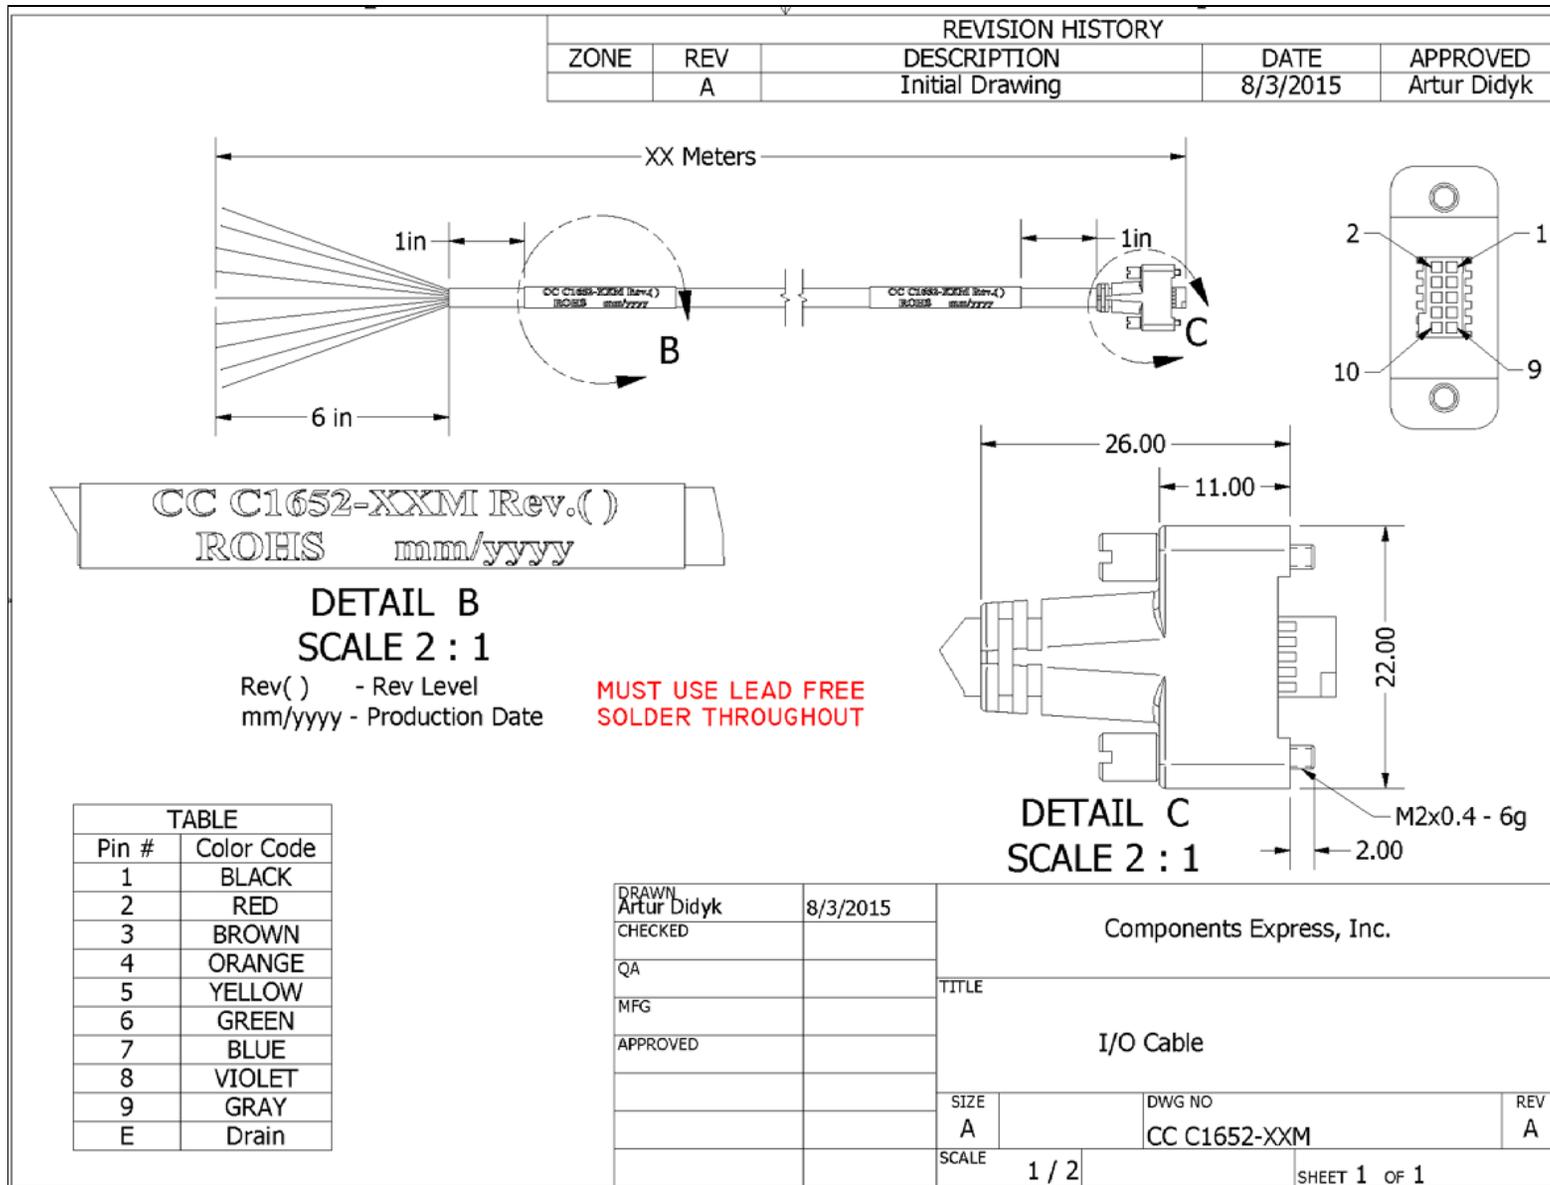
Cable Assembly G3-AIOC-BLUNT2M
